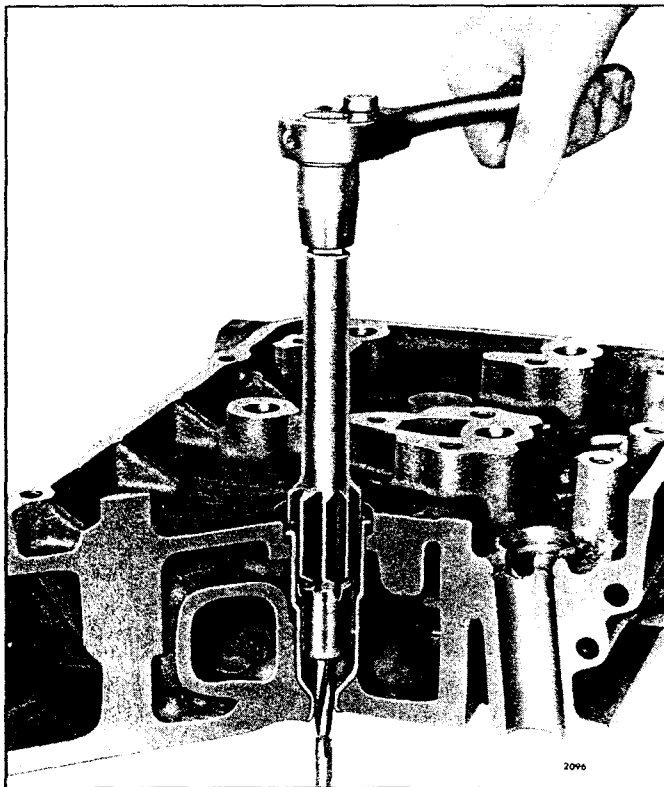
Reaming Injector Tube for Injector Body Nut and Spray Tip Using Tool J 22525-1
